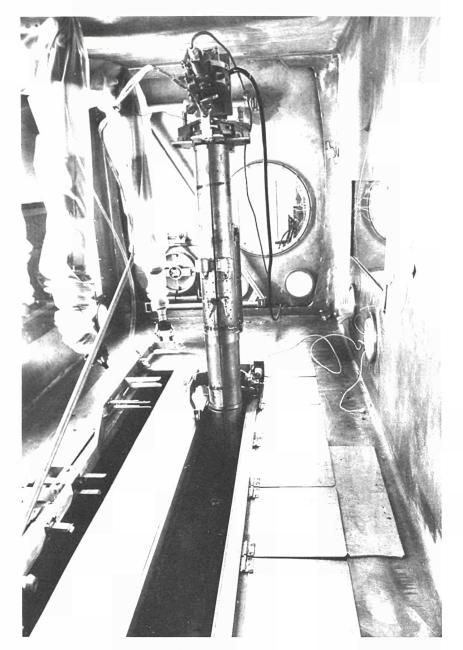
EUROS Cell. Handling tests with the complete assembly furnace, welding head, and dummy capsule.
